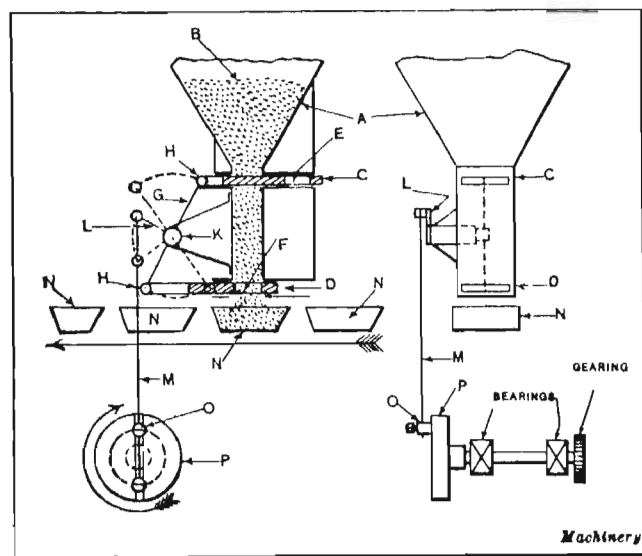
Arrangement of Hopper Valves for Handling Granular Substances
